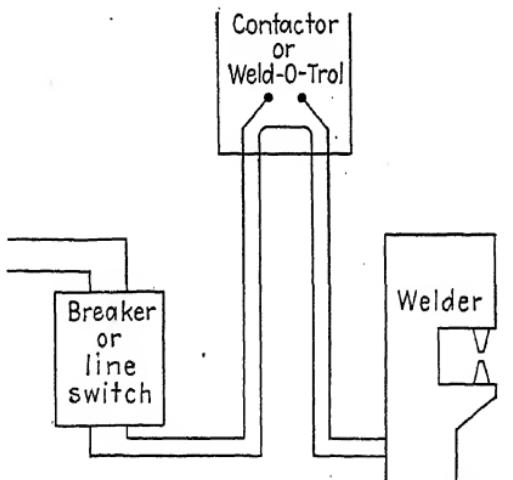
A.—Cables connecting to contactor and welder.
